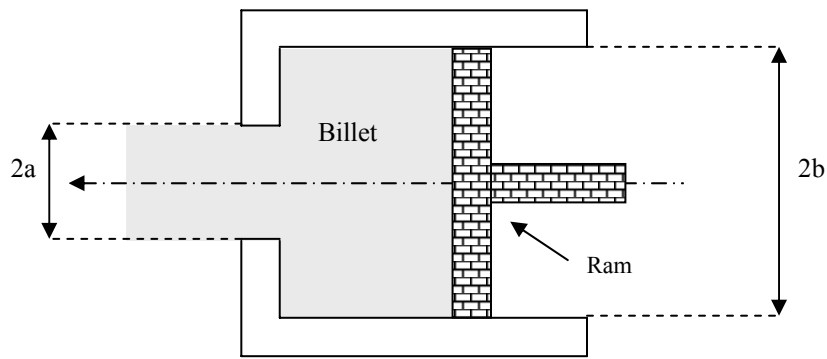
Schematic view of extrusion of cylindrical through square die.
